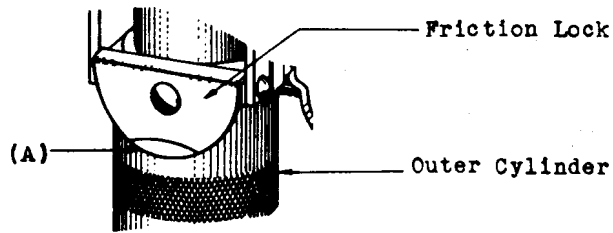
Cylinder Locking Arrangement Externally Adjusted Dashpot Relay
